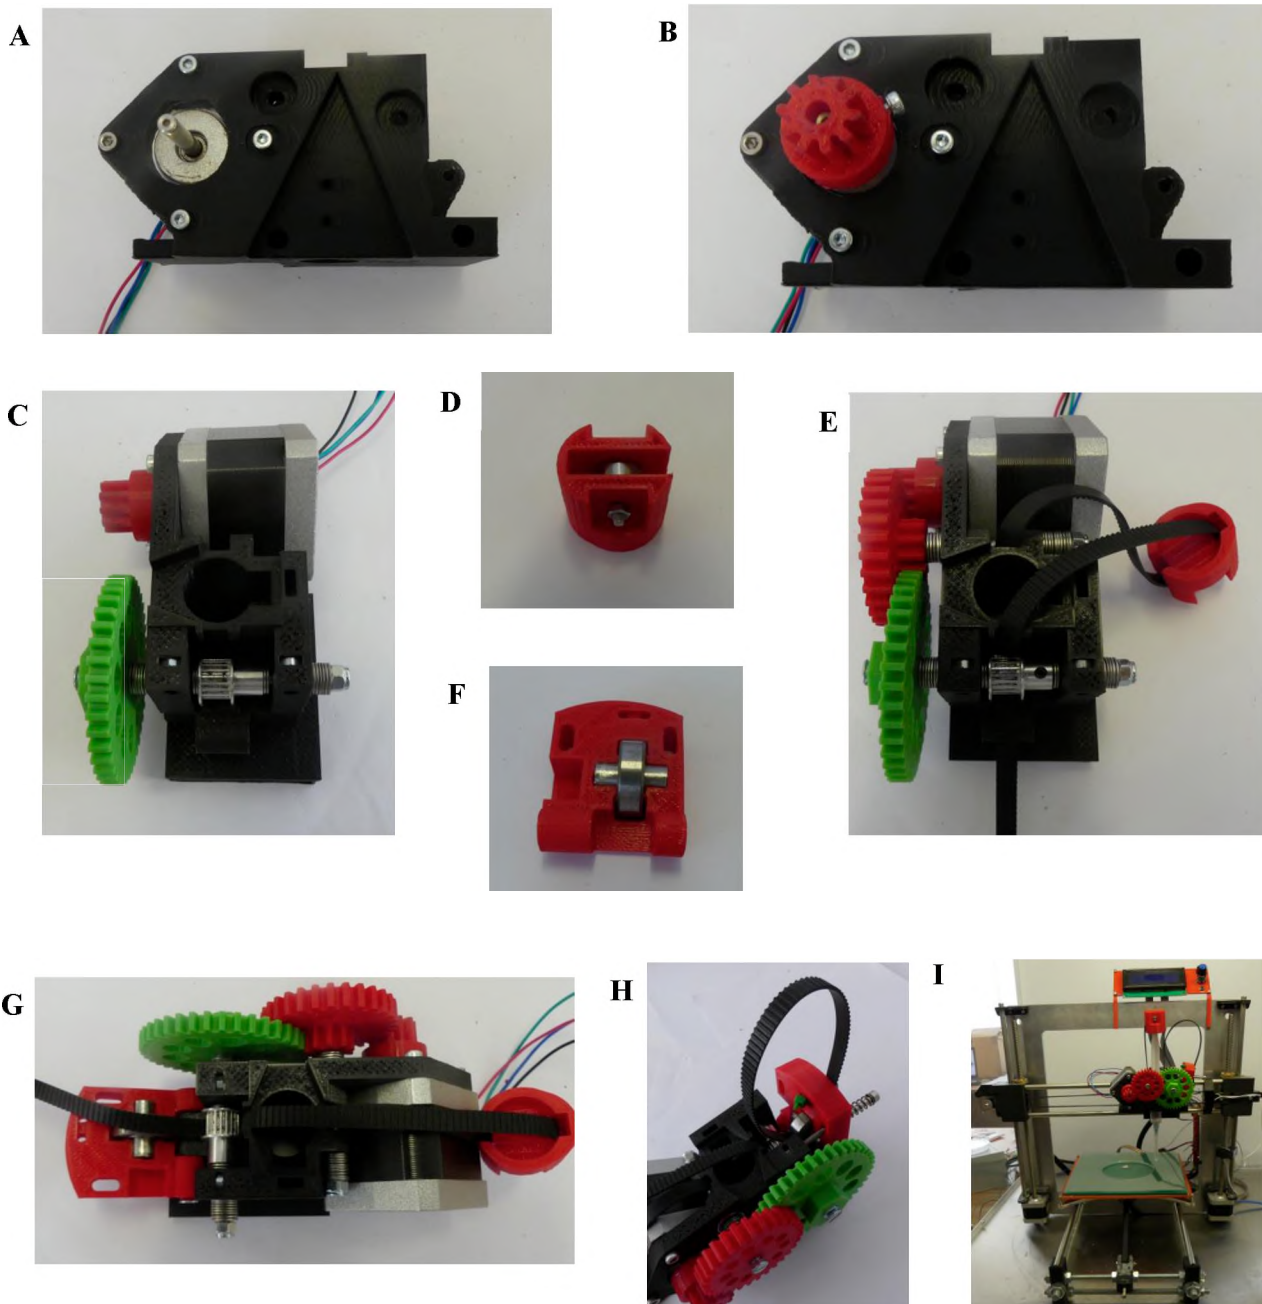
Universal paste extruder assembly process. A: Stepper motor mounting. B: Drive gear attachment. C: Large gear attachment. D: Syringe cap bearing attachment. E: Double gear attachment. F: Idler bearing attachment. G: Idler attachment. H: Idler bearing attachment. I: Final assembly on the Prusa i3 X-carriage.
